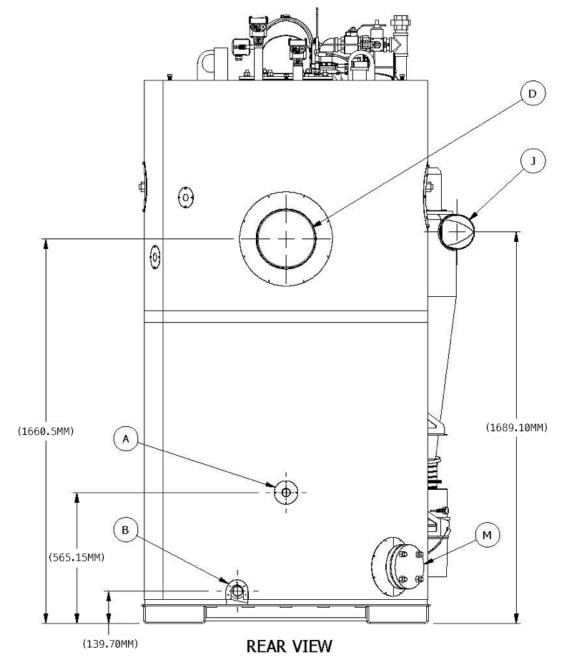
Model VSRT-60 Dimensions – Rear Side View
